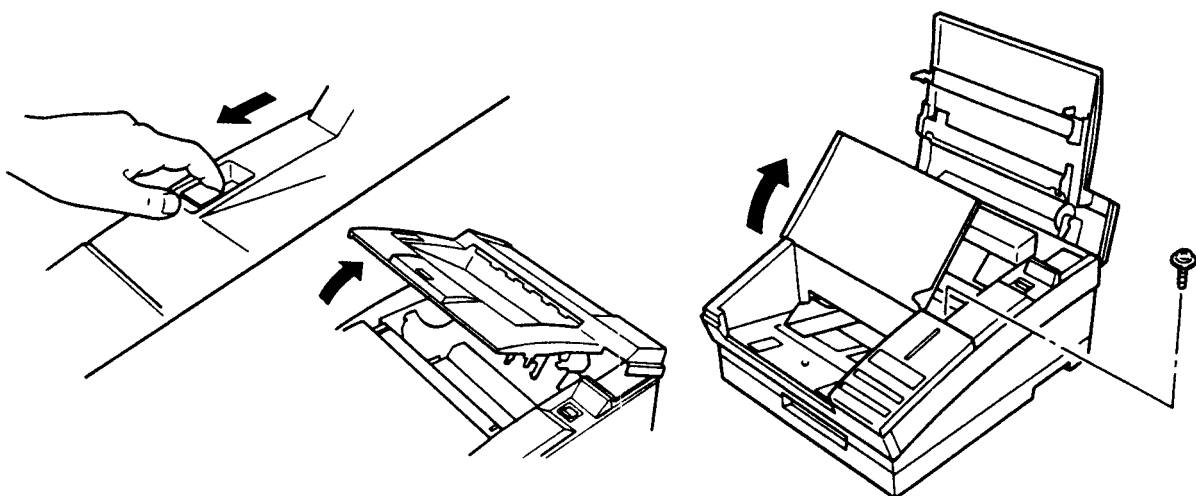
Opening the Upper Unit, Paper Cover, and Removing 1 Screw
